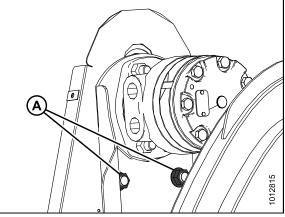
Single-Reel Drive Shown – Double Reel Similar
